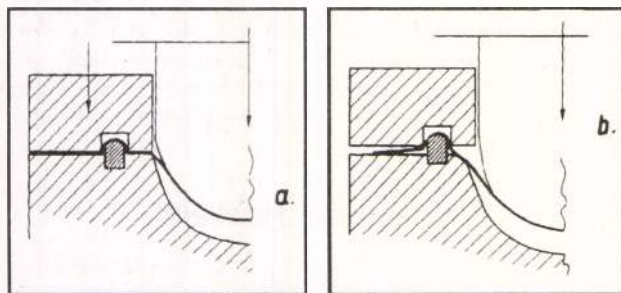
Stretch drawing (a) with blankholder contact and (b) with drawbead control.
